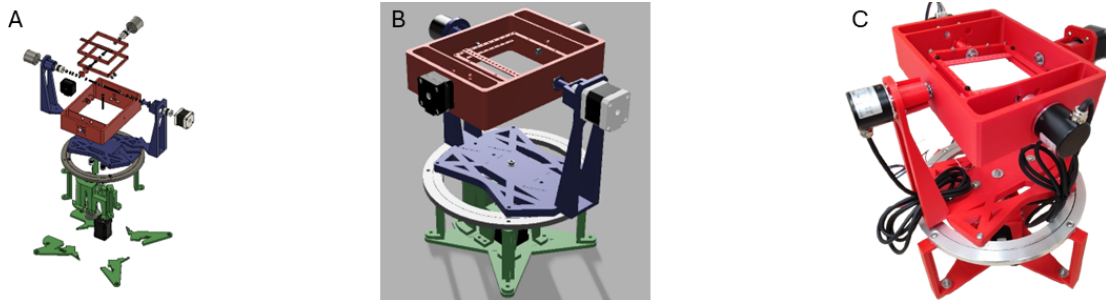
3-DoF High-Tech Fidget Spinner exploded view (A), rendered model (B) and working prototype (C).
